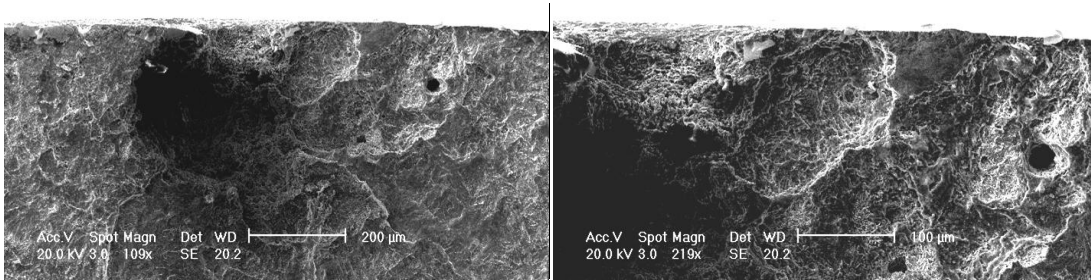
Larger scale fatigue specimen 1 - Flaw having caused the failure
